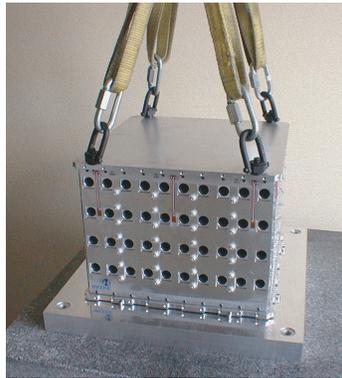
lifting assembly off the base plate with a 4-legged sling..
